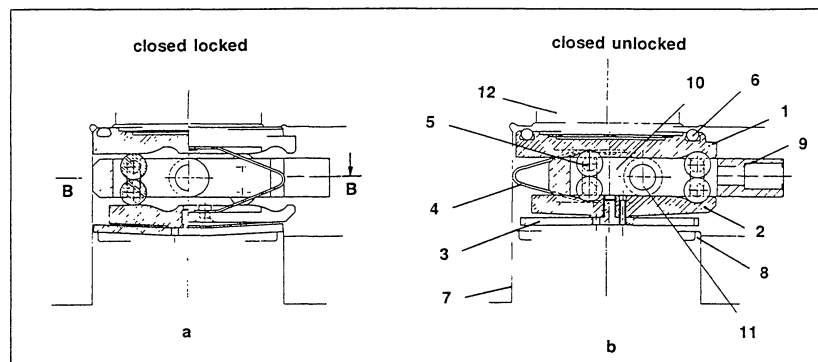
Gate valve. 1: upper clapper. 2: lower clapper. 3: pre-load spring. 4: return spring. 5: roller. 6: O-ring gasket. 7: sampling tube (ST). 8: ST shoulder. 9: GV power arm. 10: roller plate. 11: guide. 12: oven.
